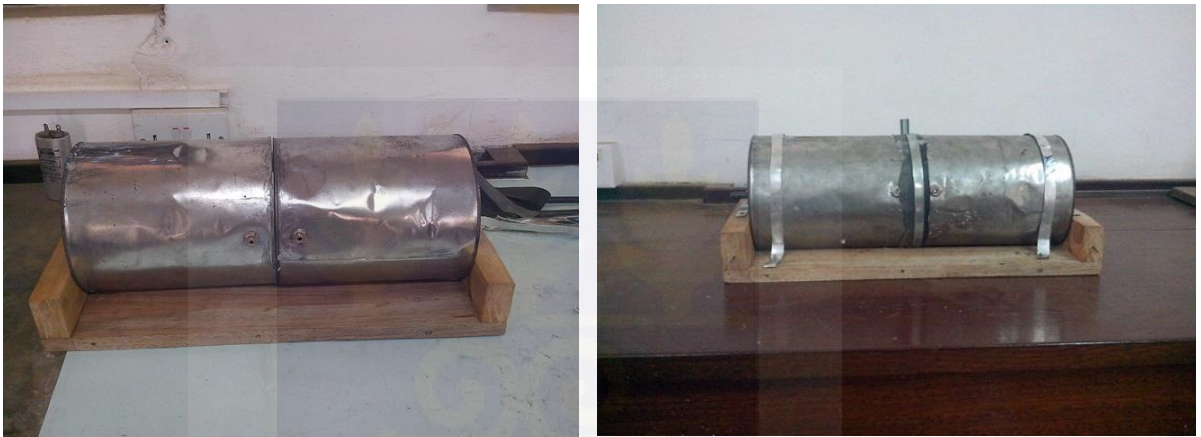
Two containers joined horizontally using strips of aluminum sheets
